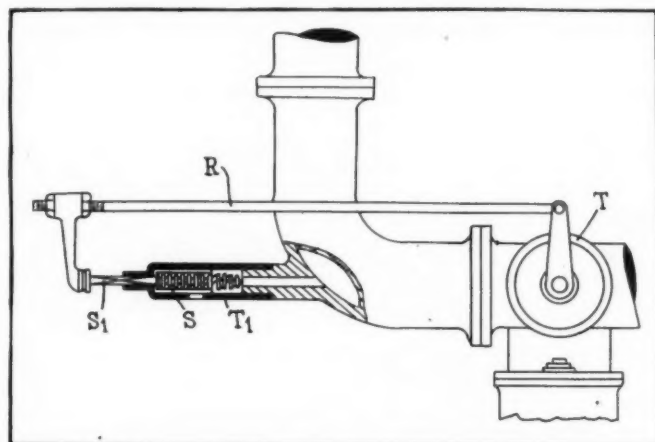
Webb positive-acting auxiliary air supply for gasoline engine carbureters
